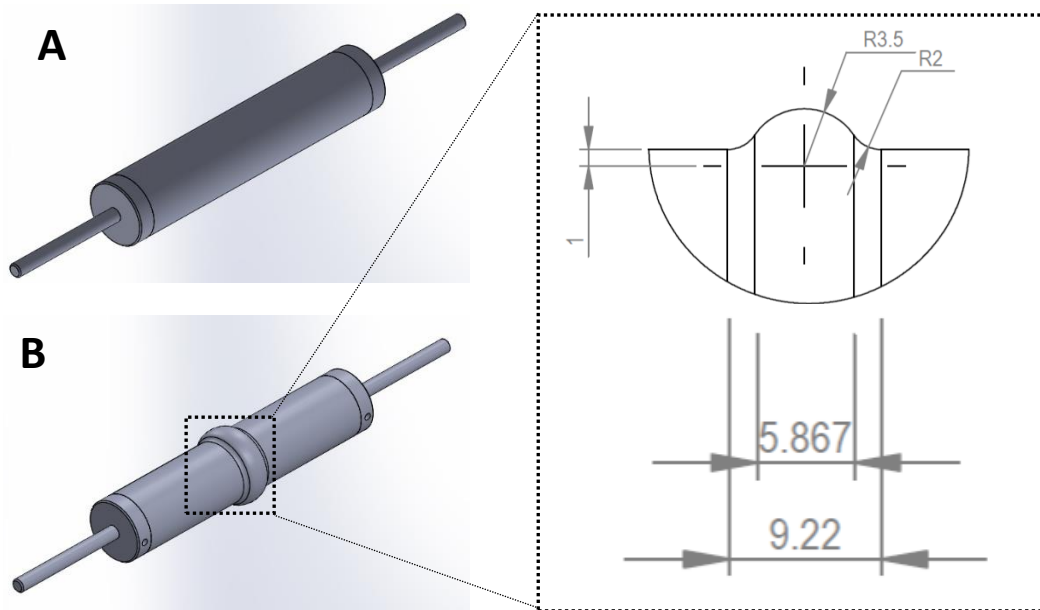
Renderings of 23mm Electrospinning Mandrels: Flat (A, top left) and Humped (B, bottom left) with an engineer drawing showing the cross-sectional view of the hump and defining geometry (right)
